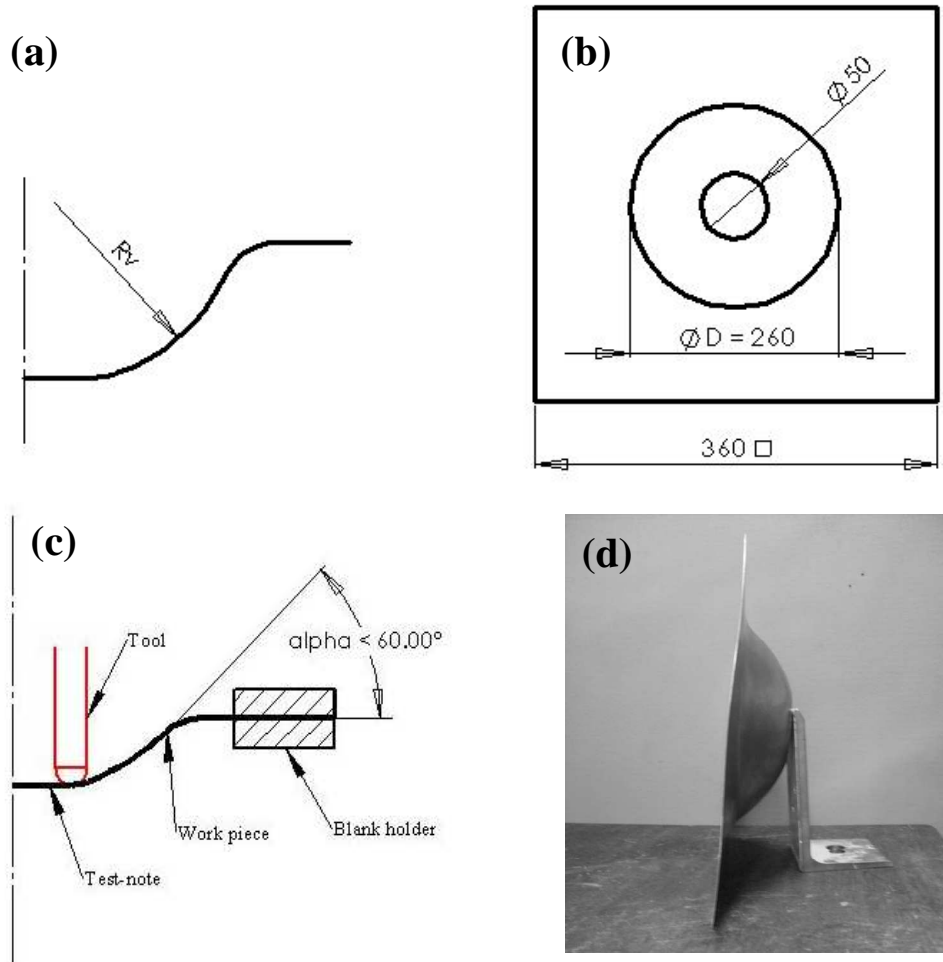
(a) Cross-section of test-bowl structure; (b) Plan view of test-bowl structure; (c) Schematic showing ISF of test-bowls; (d) a test-bowl used in the experiments (All dimensions in mm)
